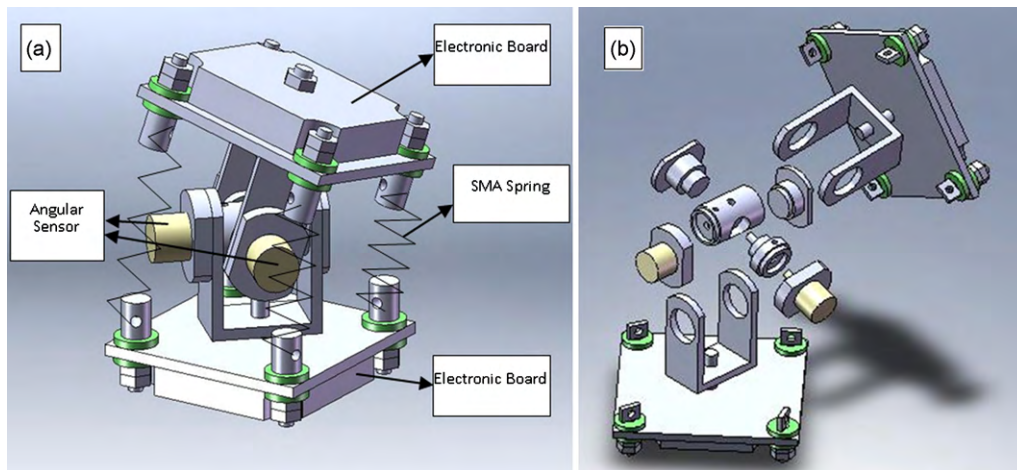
Schematic of the FlexiBot (a) assembly design and (b) exploded view.
